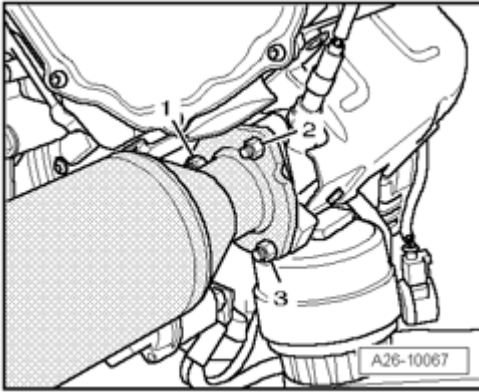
Removing Nuts & Right Front Exhaust Pipe With Catalytic Converter
